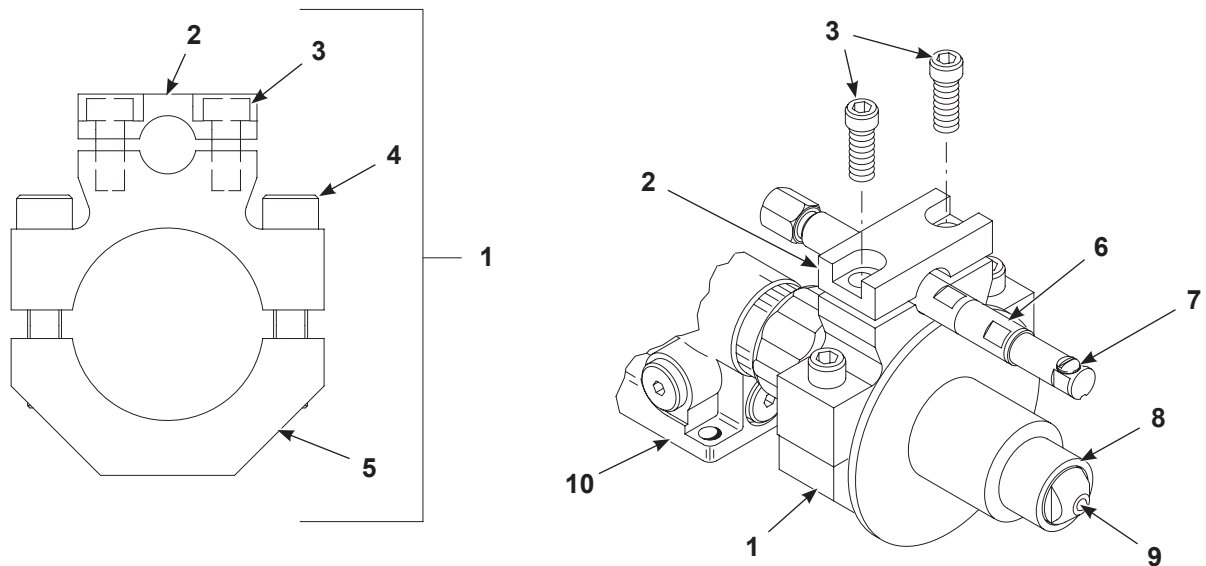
Fixed Mounting Bracket, Check Valve, and Nozzle Installation (MEG Gun Installation Shown)
